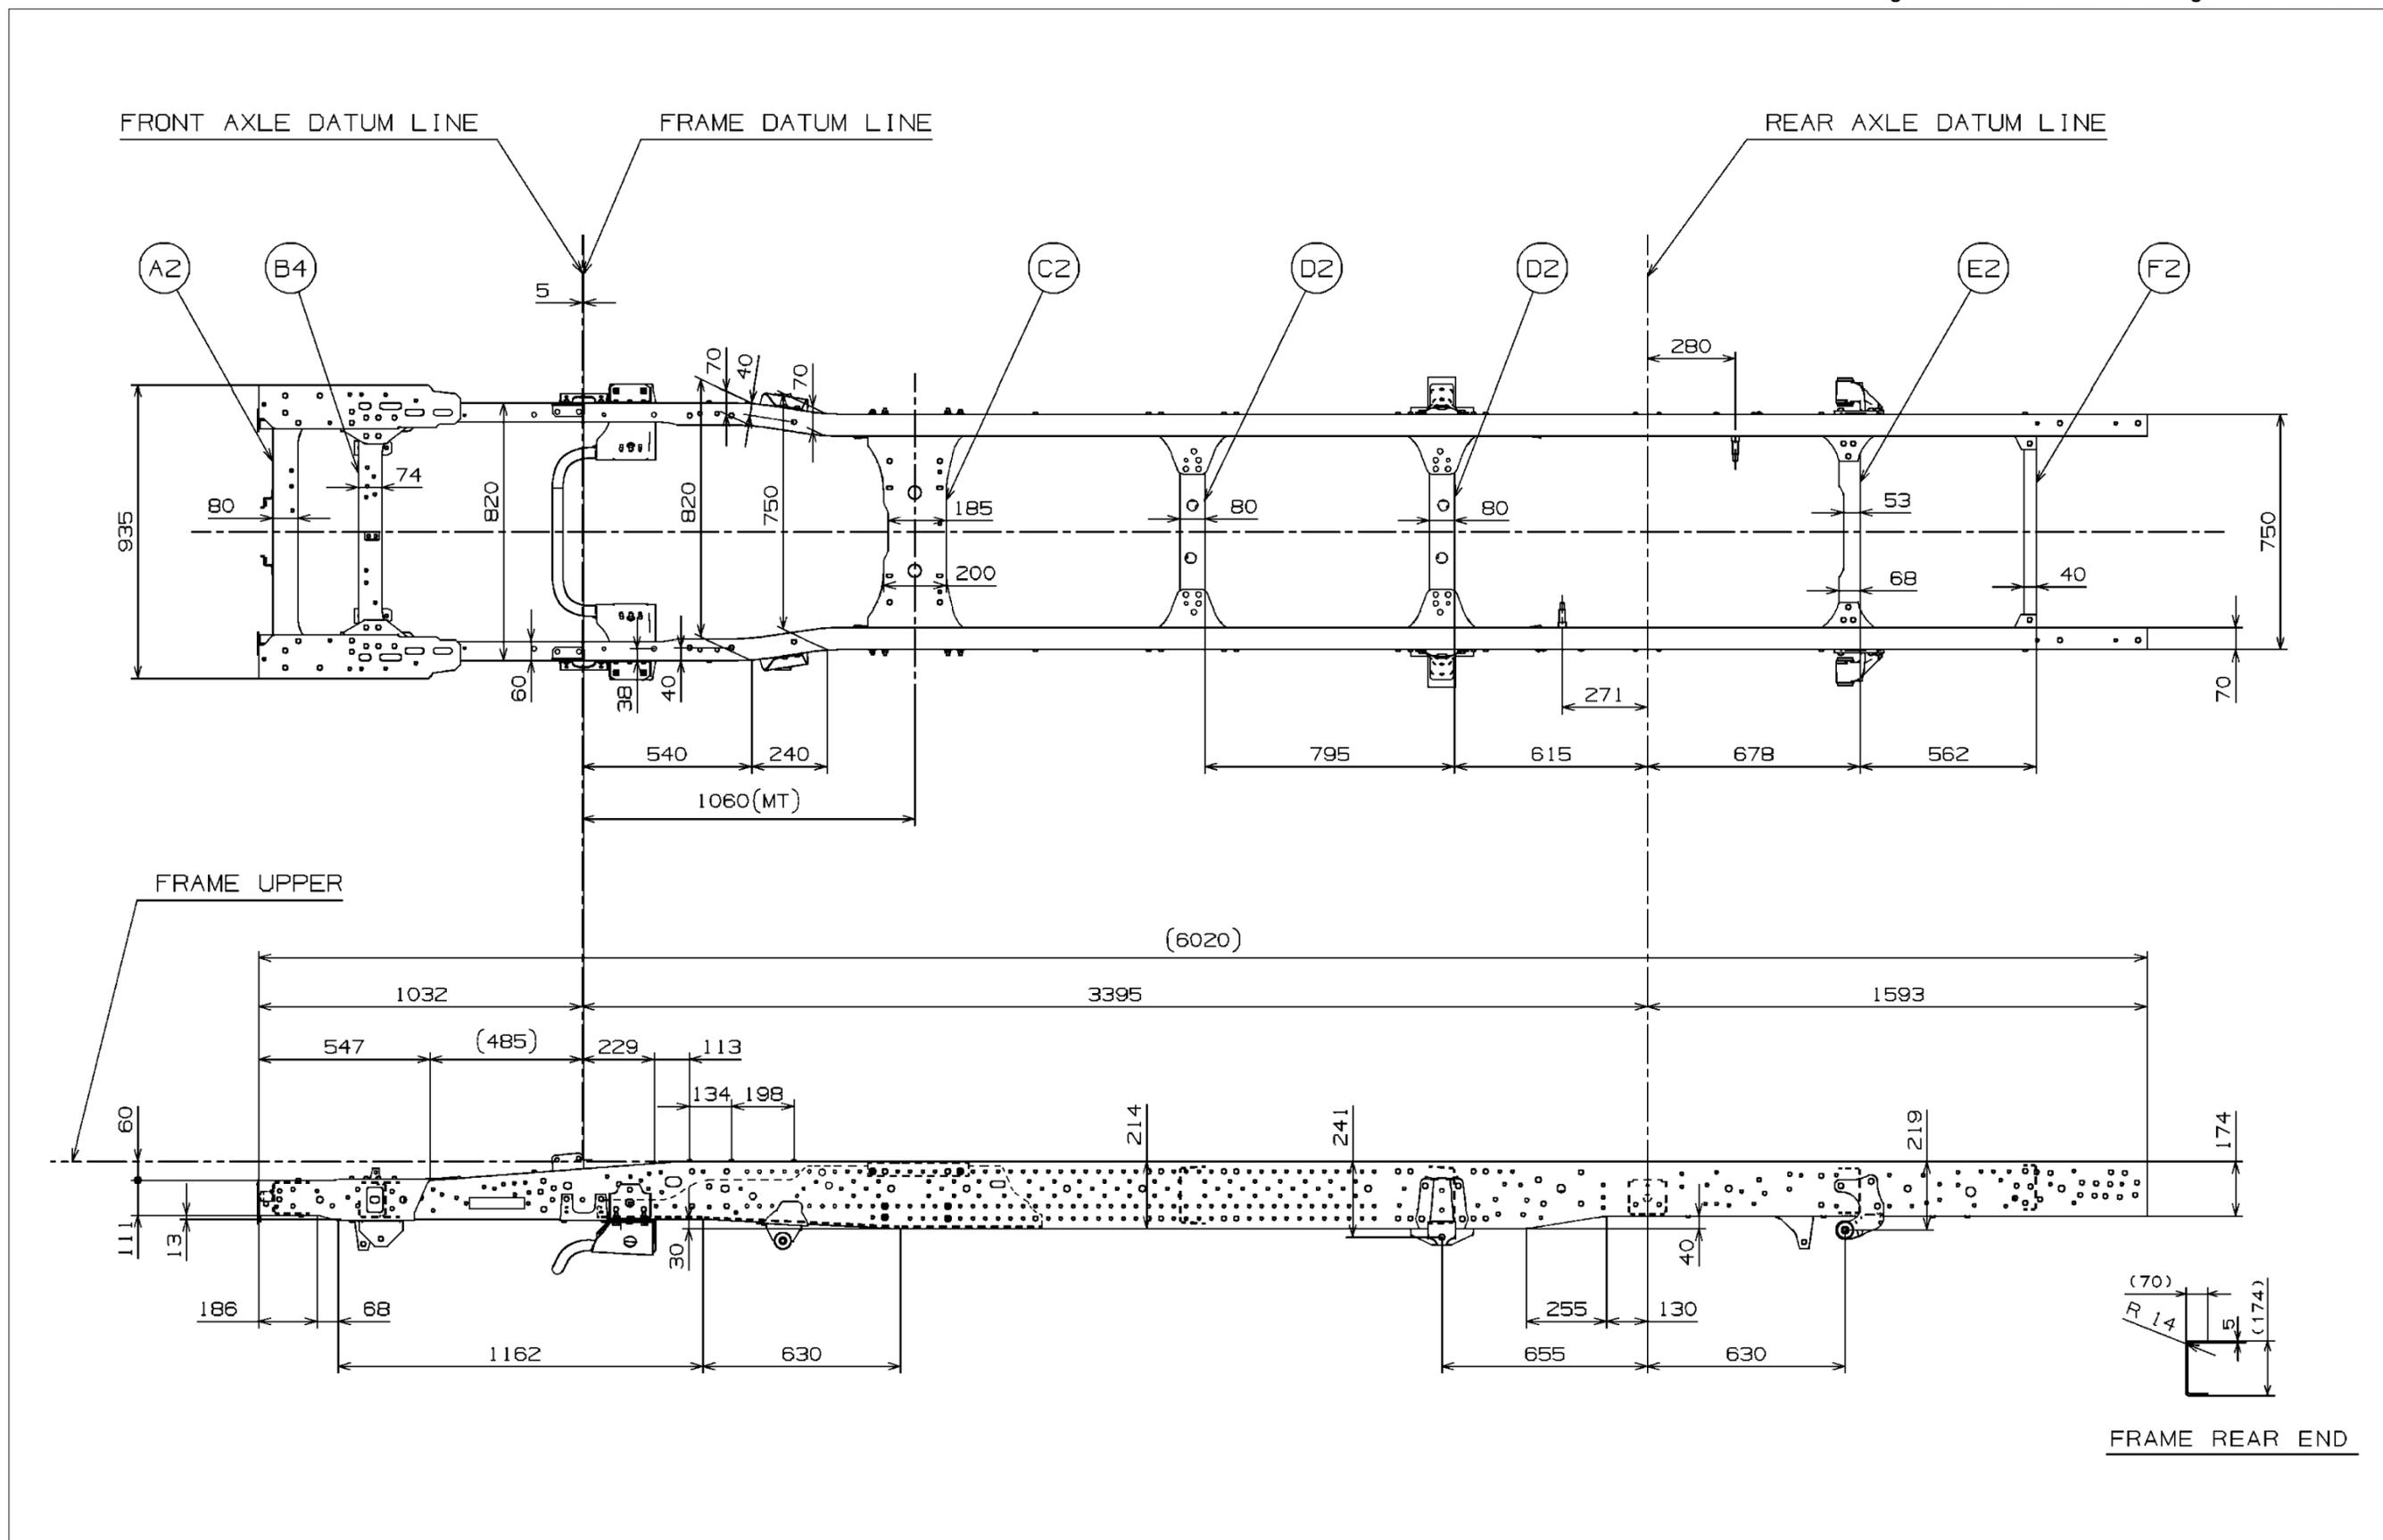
Chassis Frame Drawing NNR85L-HD5WYEN
